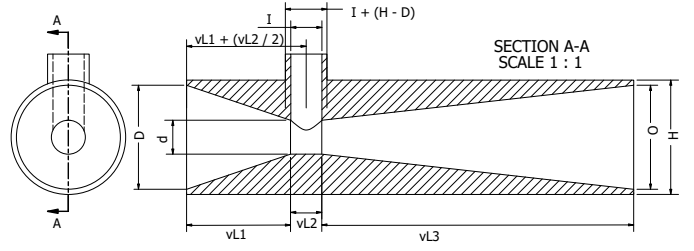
Technical drawing of a Venturi nozzle with parameters as dimension placeholders
